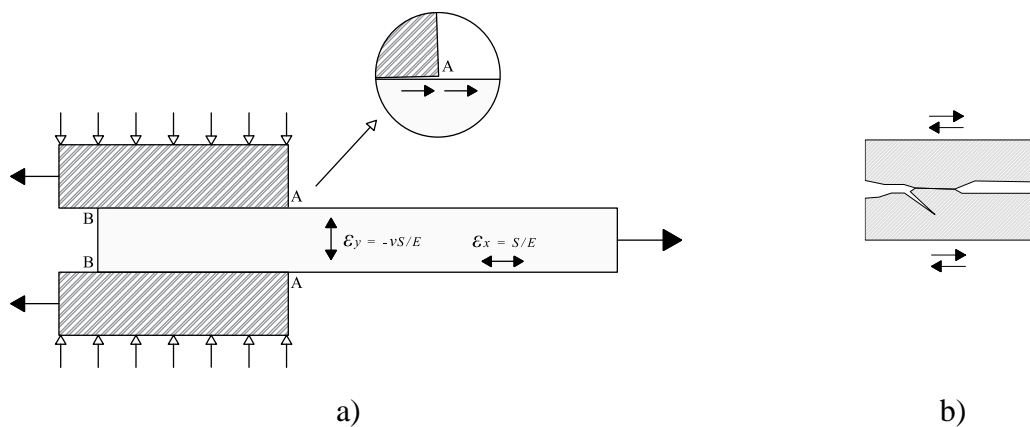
Fretting corrosion mechanism: a) detailed analysis of clamped surfaces; b) crack initiation by shear.
